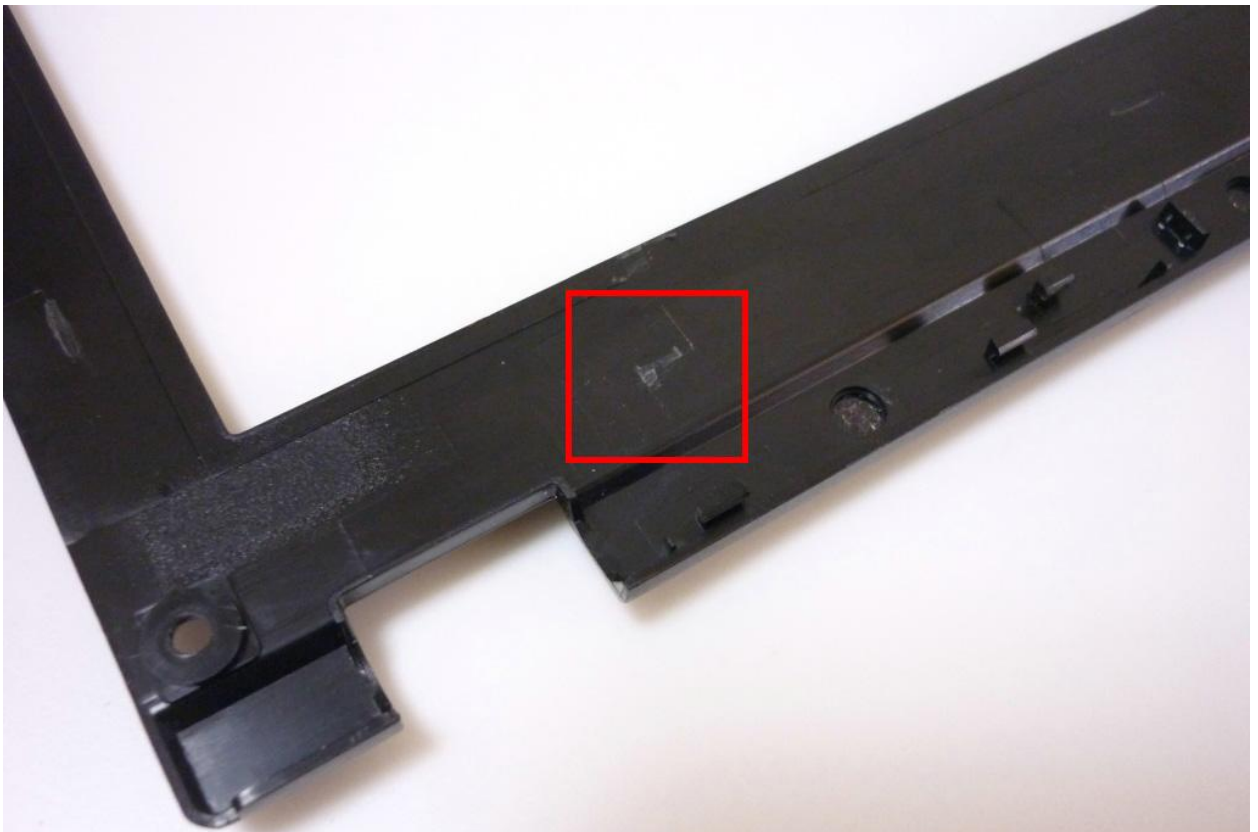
Right inner LCD bezel latch was removed to fit Full HD LCD panel (the left one looks similar)
